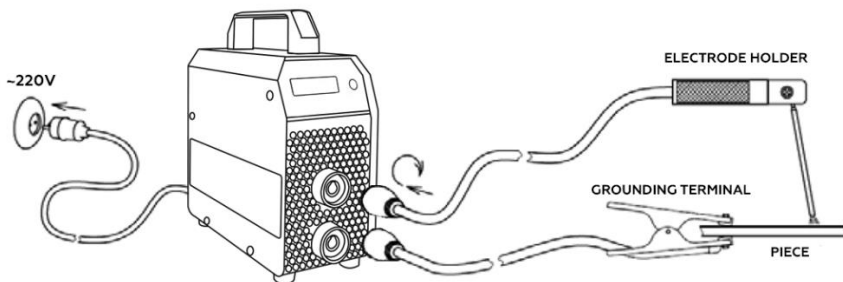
Machine connection diagram for welding with stick electrodes
